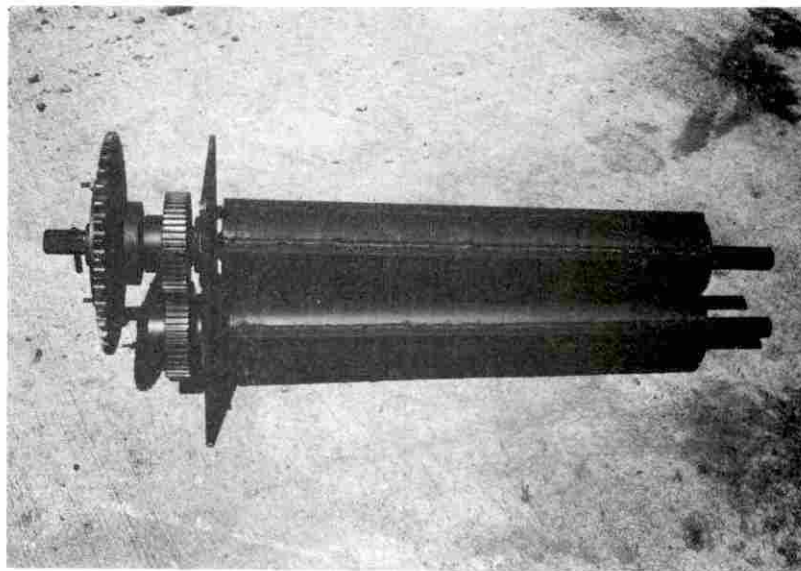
First design of horizontal snapping rolls with timing gears and shear pin drive sprocket
